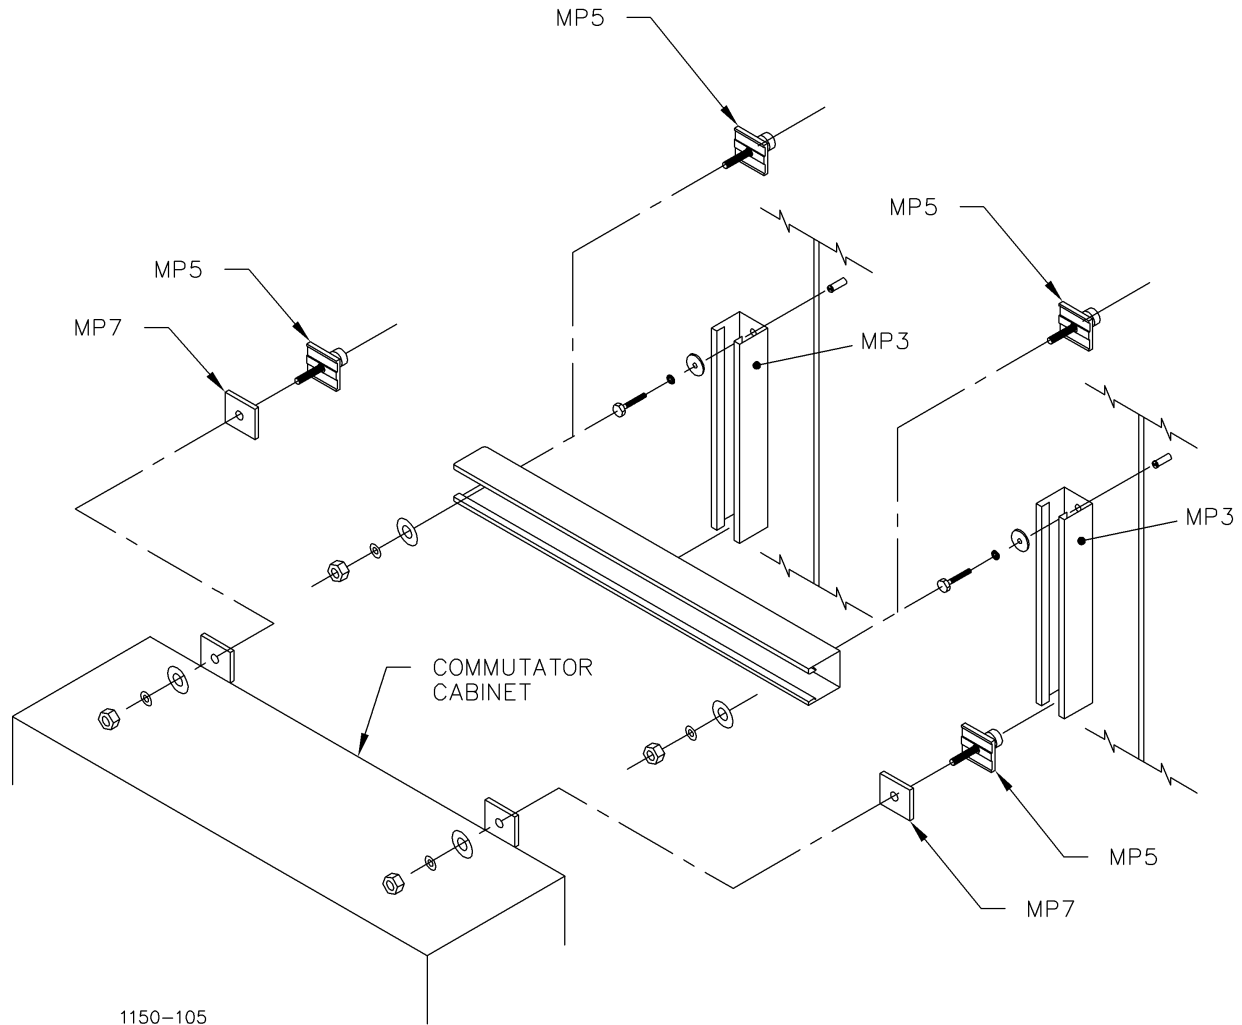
Commutator Rack to Shelter Wall Installation Diagram
